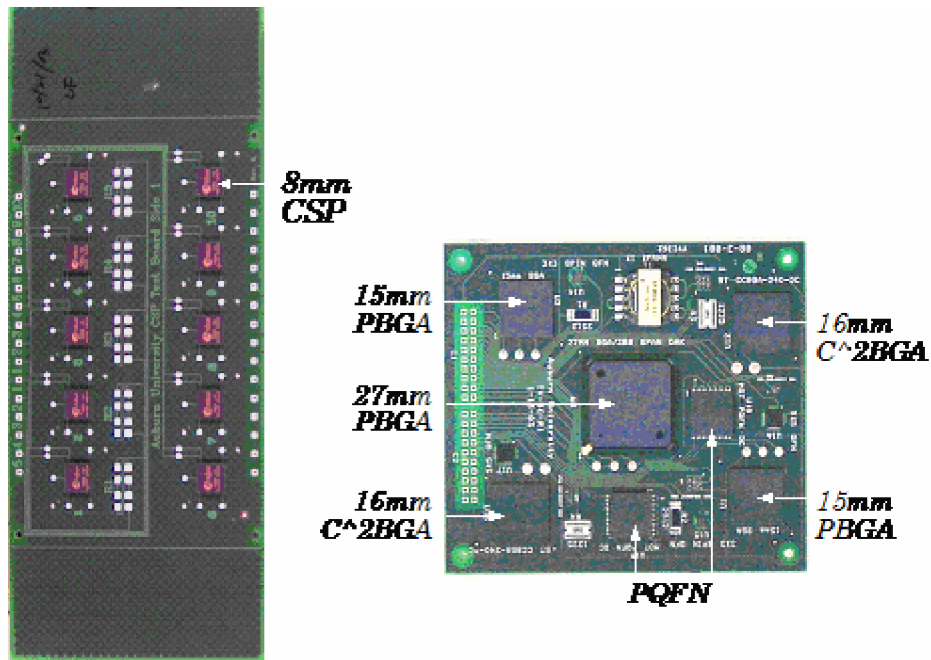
(a) BGA Test Board A (8mm Chip-Scale Package) and (b) BGA Test Board B.
